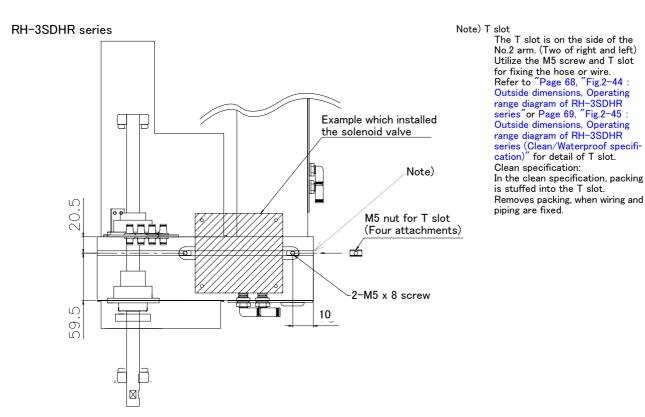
Location of screw holes for fixing wiring/piping (RH-3SDHR series)
